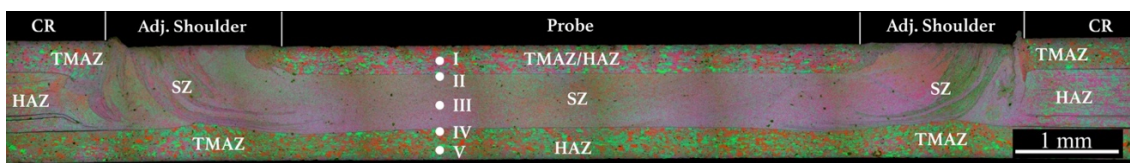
Cross-Section of the multilayered refill FSSW weld indicating tool component placement, metallurgical zones, and the height of positions I-V.
